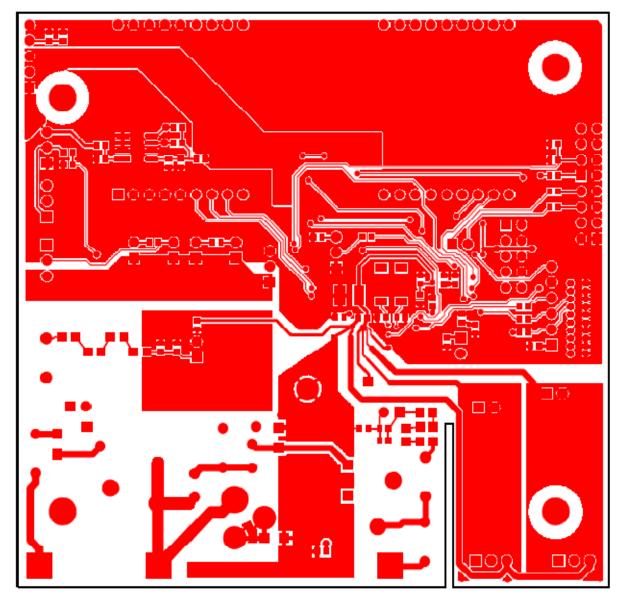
71M6531N12A2 Demo Board: Bottom Copper Layer – Layer View from Top
